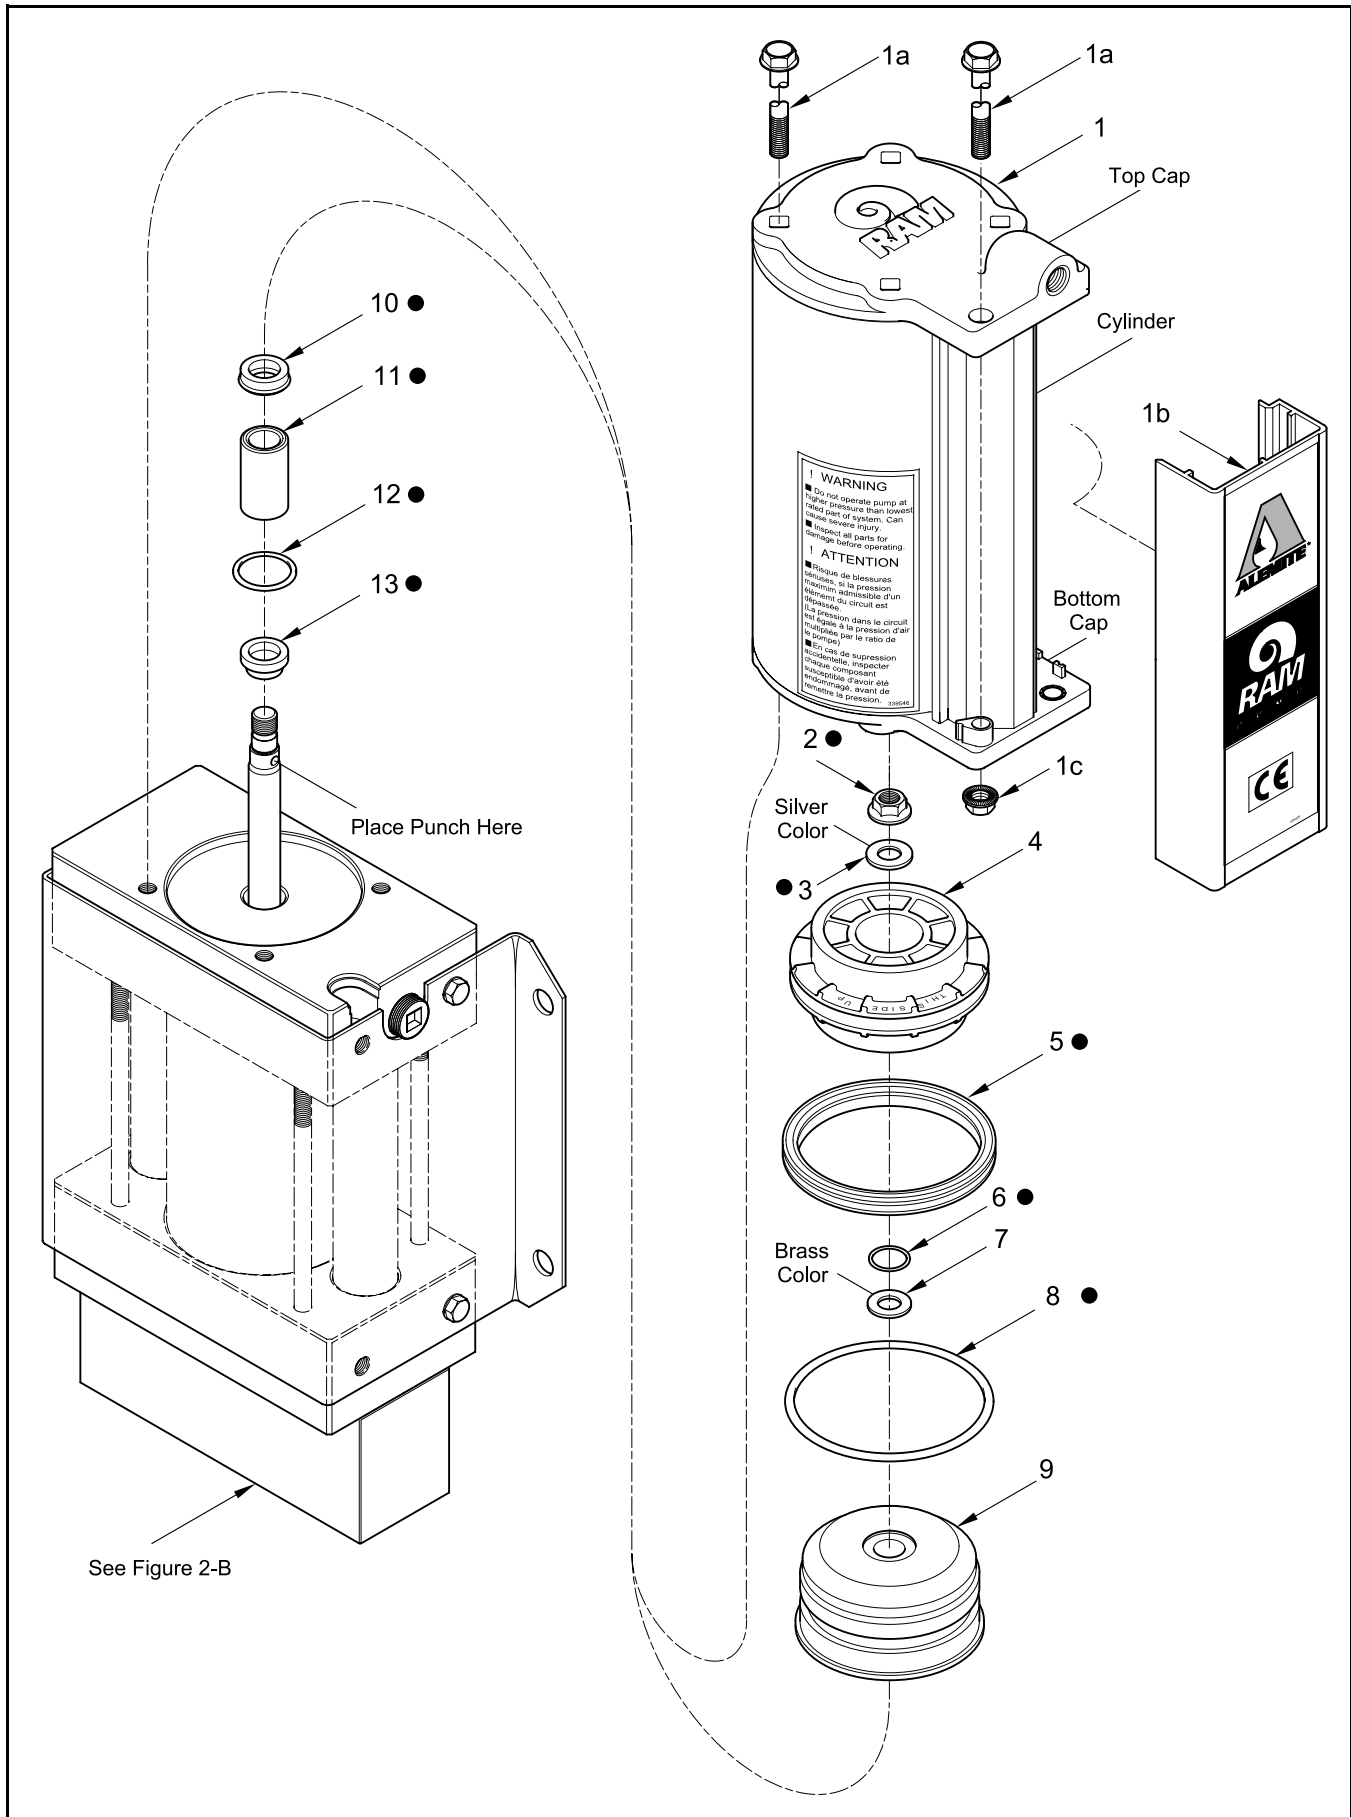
A Fluid Evacuation/Transfer Pump Model 9920 - Exploded View
